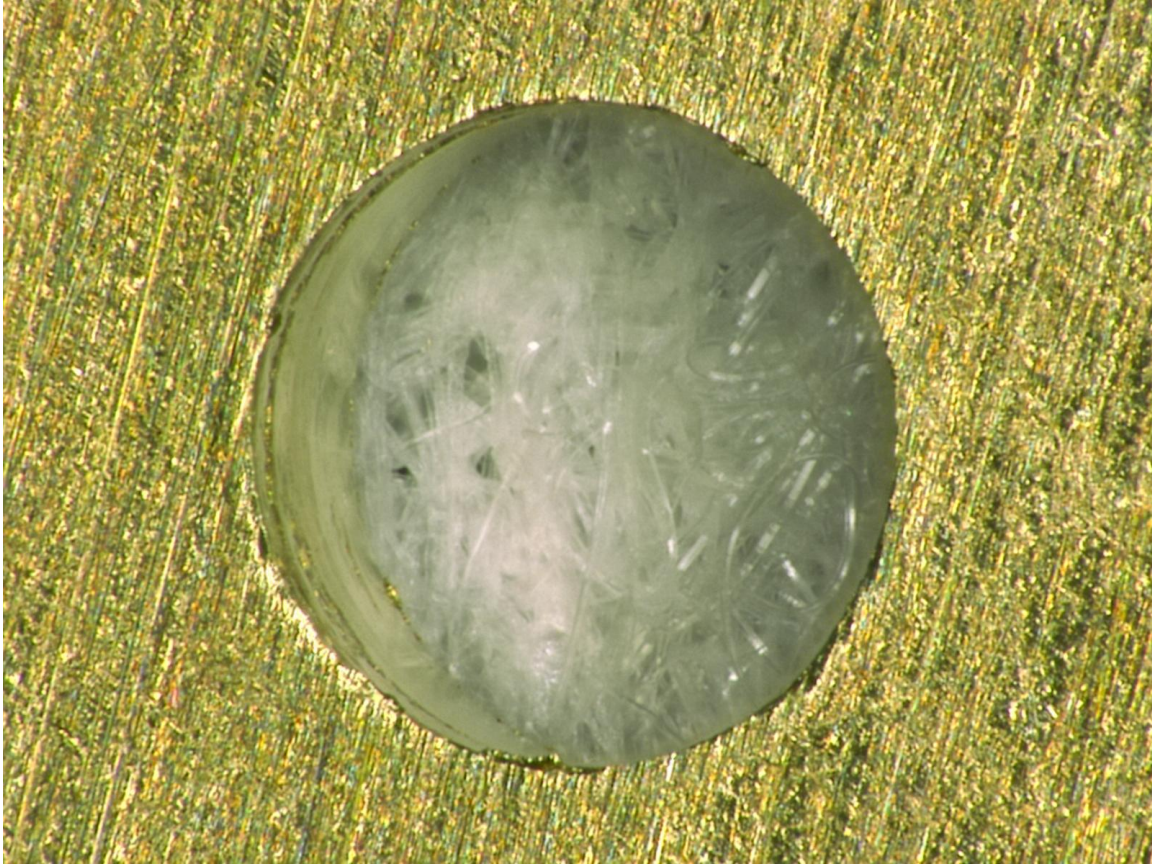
Image taken at a 15° angle of 1 mm cylindrical ring electrode hole formed by CNC machining a piece of brass sheet metal. Small burrs and imperfections from the machining process are visible around the edge of the hole.
